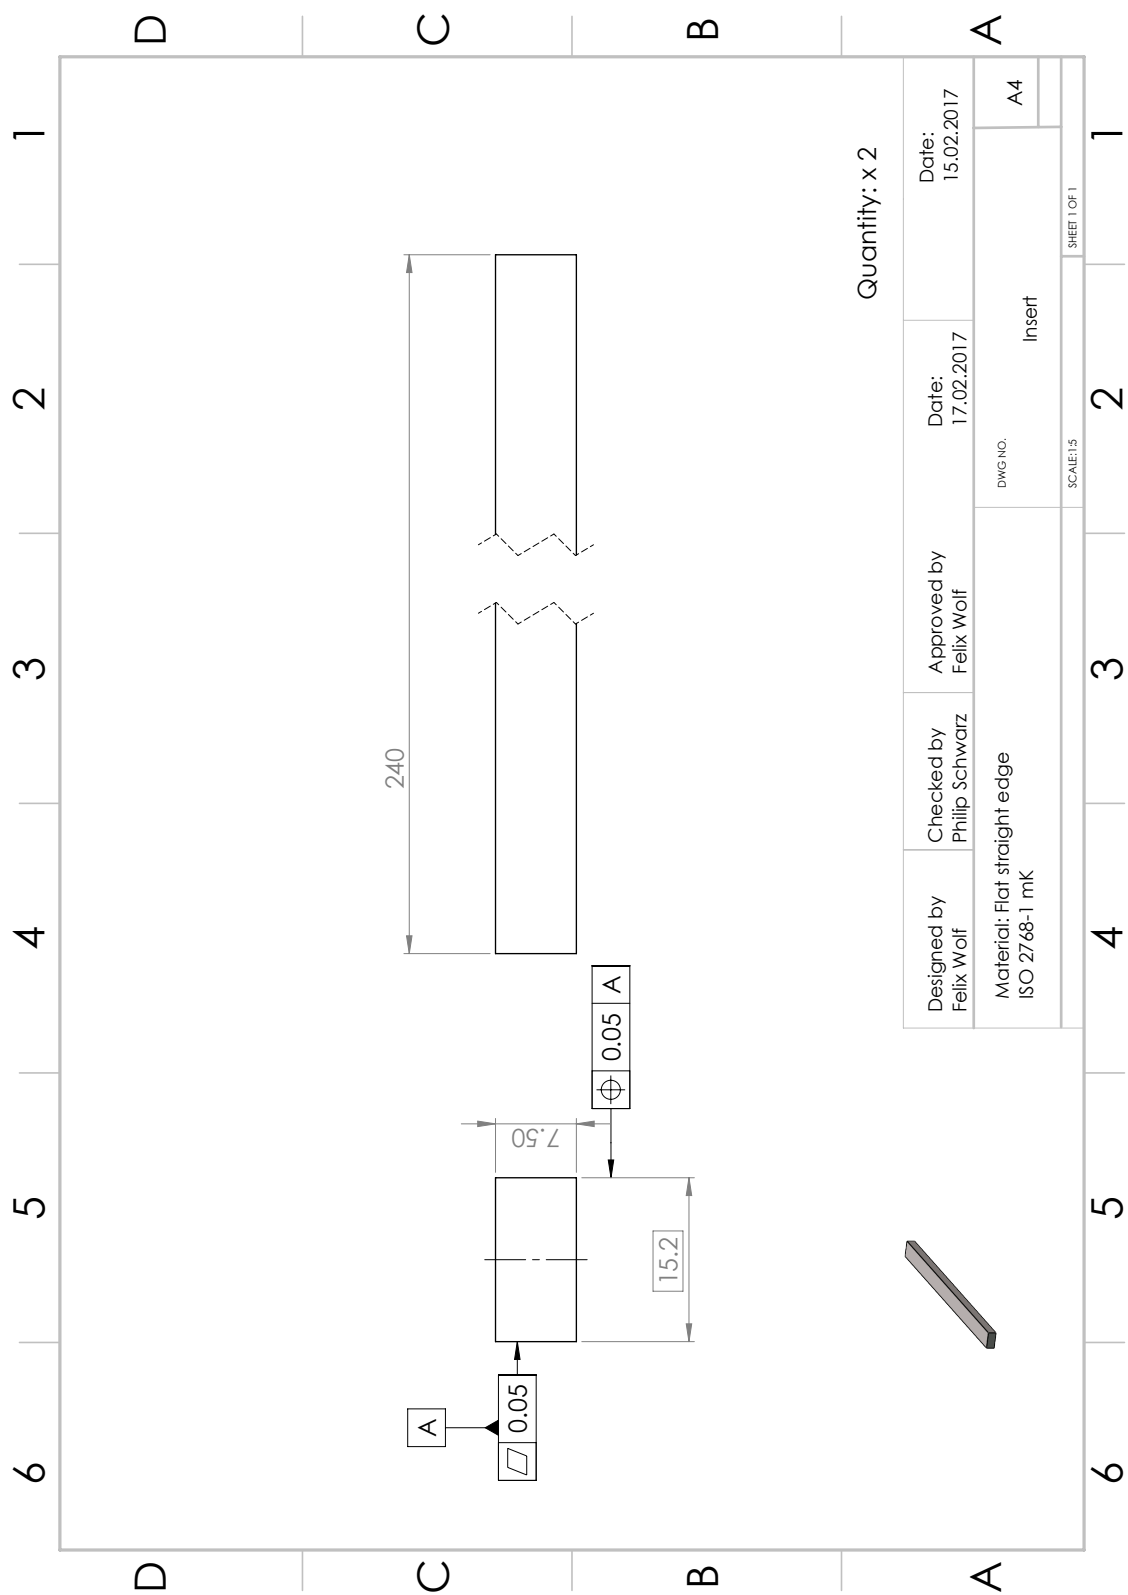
Manufacturing drawing of the insert for the heat-treatment mould.
